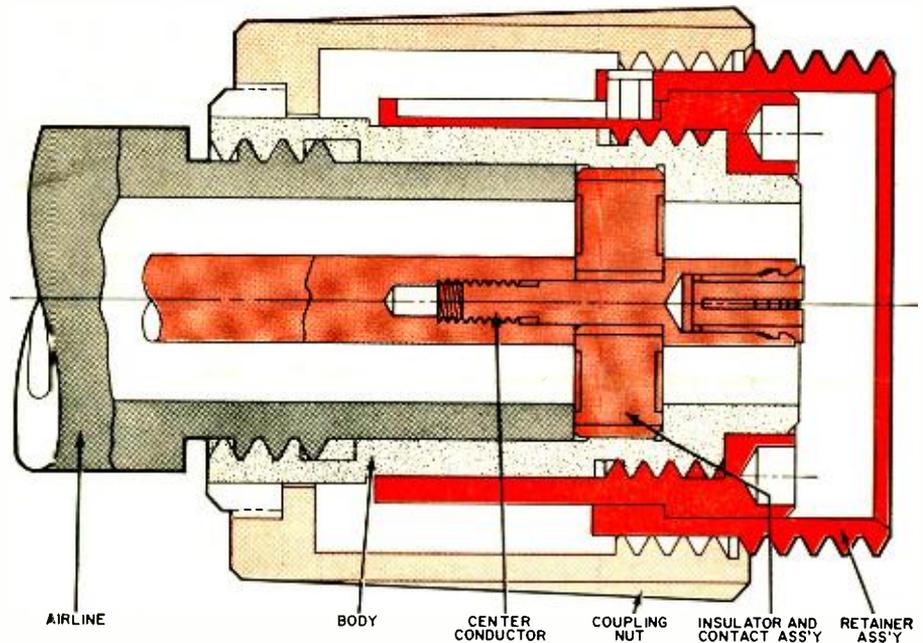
Assembly drawing of the 7-mm coaxial connector. The mechanical tolerances are held to 0.0001-inch and manufacturing is done in clean room.
